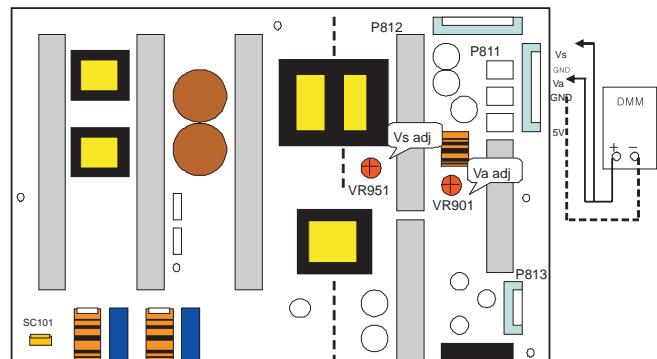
50inch Power PCB Assy Voltage Adjustment
